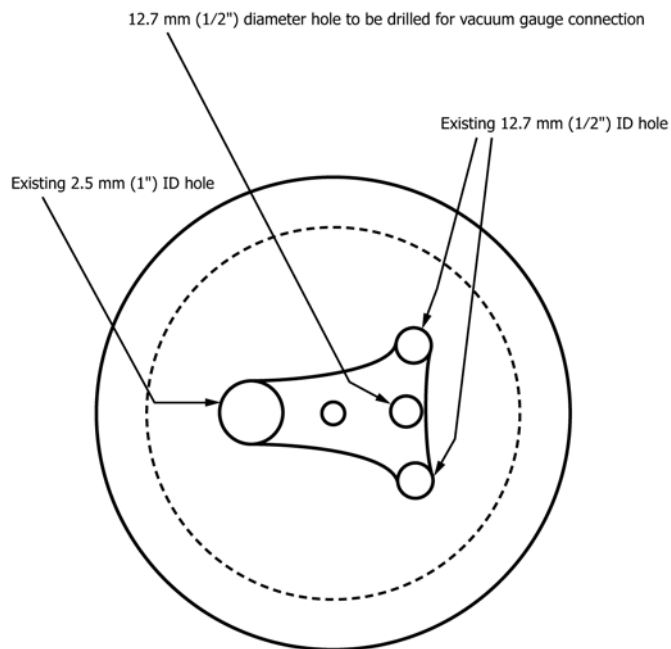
Aluminum Alloy Still Lid Showing Location of the Hole for Vacuum Gauge Connection
